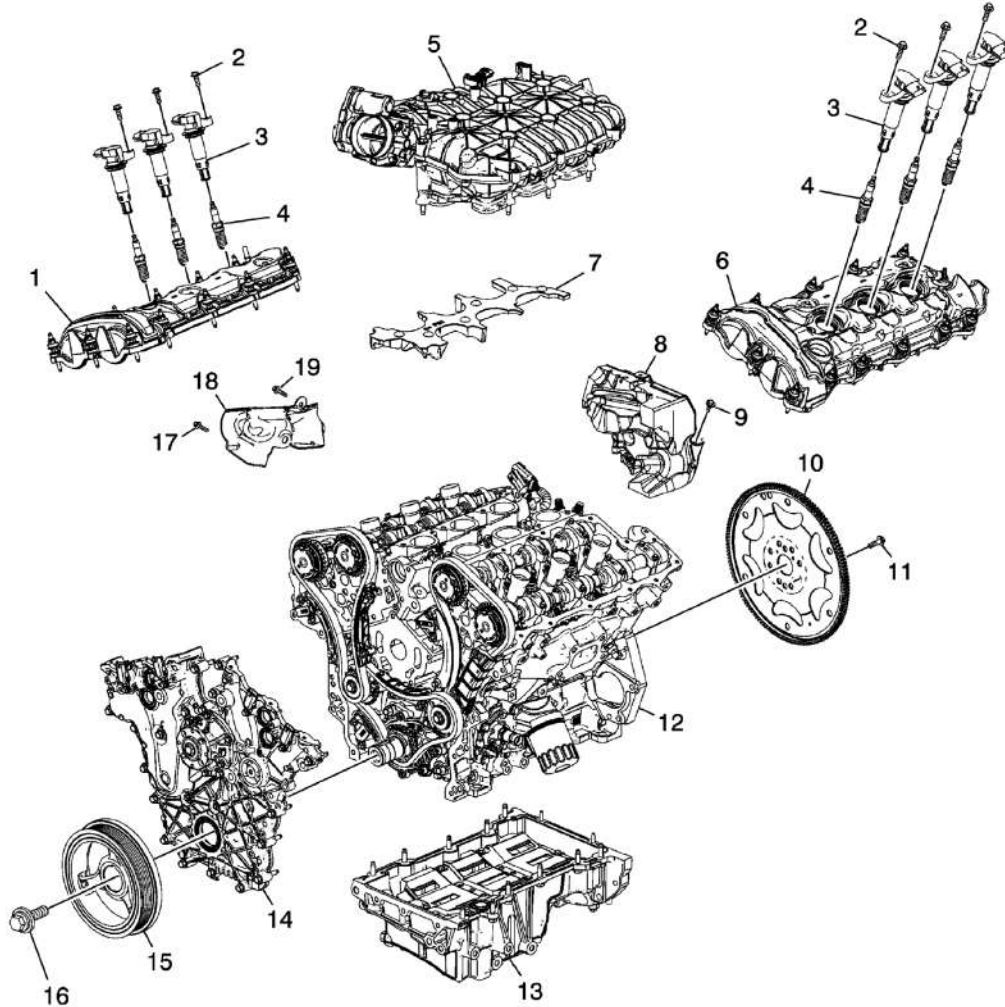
Engine Covers and Component Assemblies (1 of 2).
